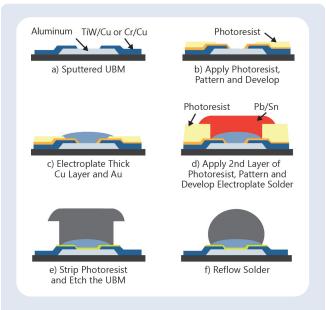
Electroplating Technique (with TiW/Cu or Cr/Cu UBM and 96PbSn lead-containing solder).
